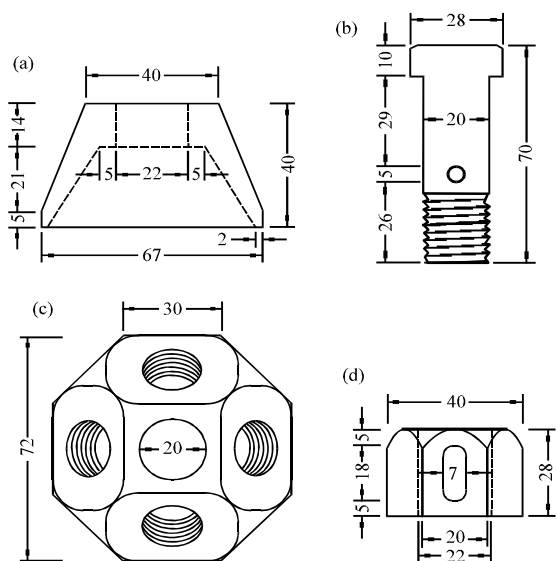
Dimensions of test connector. (a) conical end piece (b) bolt (c) steel ball and (d) sleeve
